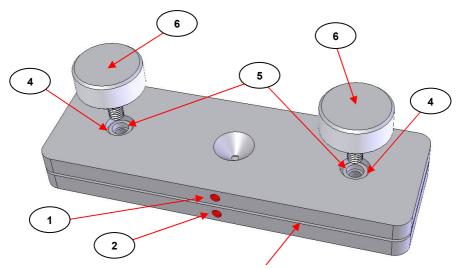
Sample Placed Over Diamond Window on Lower Support Plate Assembly
